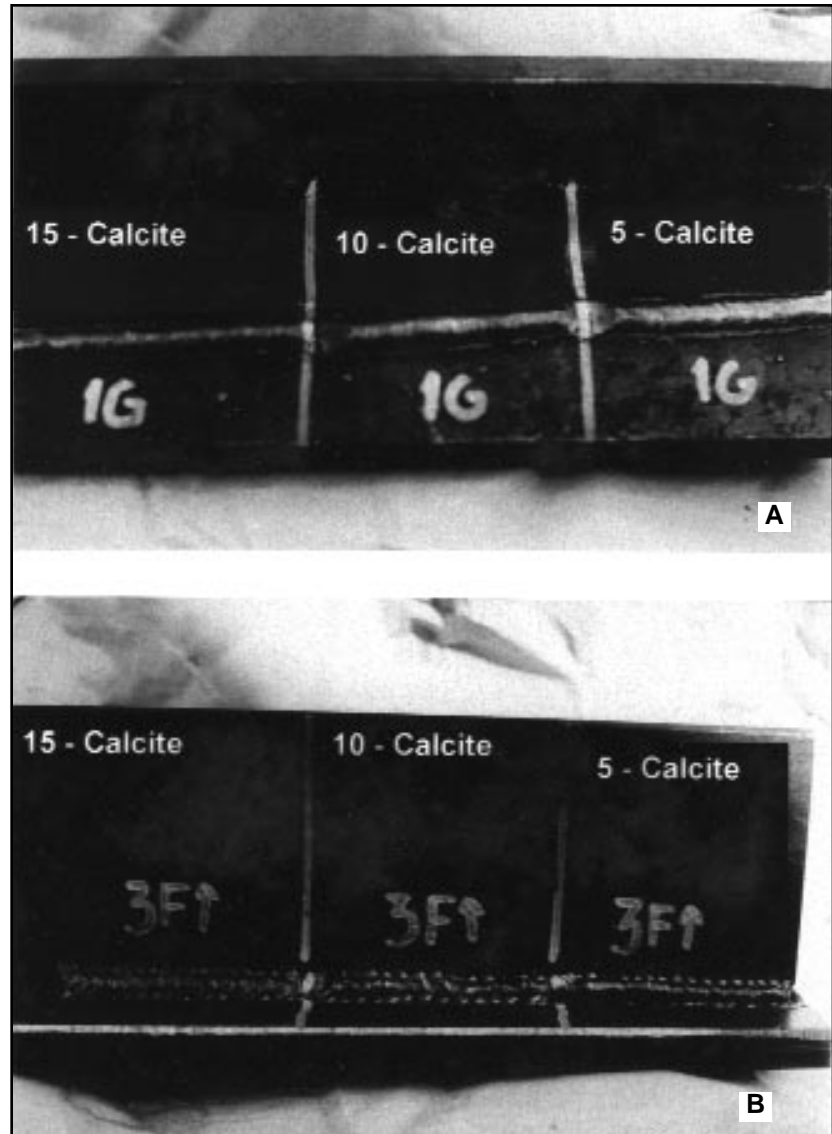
Beads obtained welding on DC(+). A — Flat position; B — vertical uphill position.
